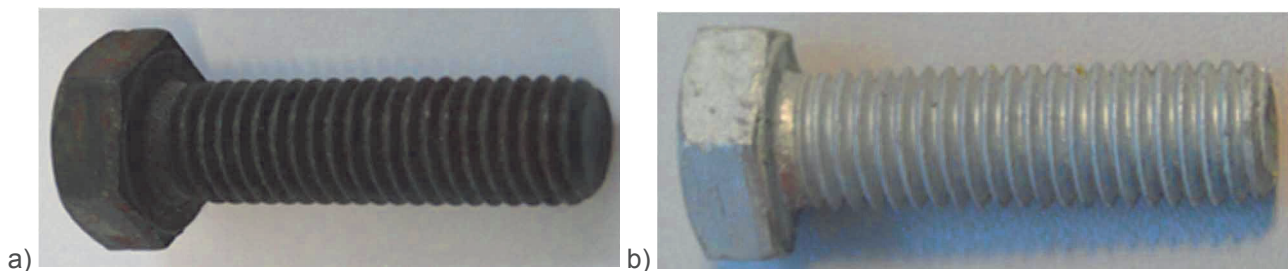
Tested bolts a) before, b) after hot-dip galvanizing process
